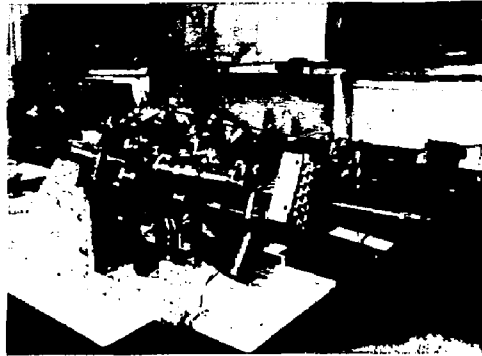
The PLT rotating pump limiter assembly. (83E1578)
